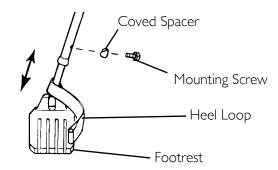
Adjusting the Footrest Height - 70° and 70° Taper
